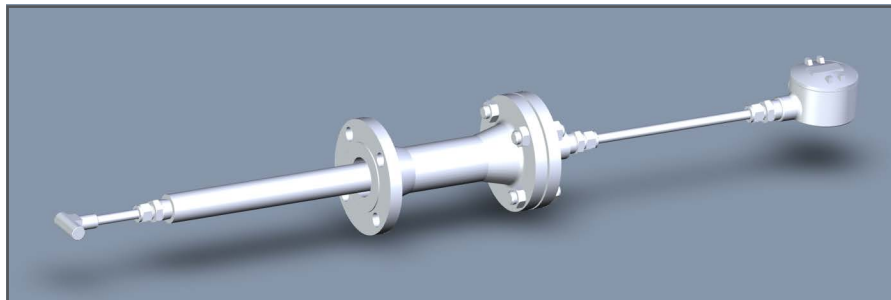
Example of a T5MAX Transducer in an IMA72 Assembly that Mounts to 2" Nozzles
